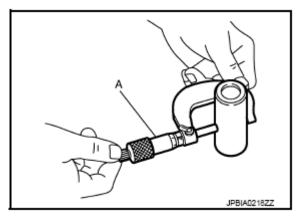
Measuring Outer Diameter Of Piston Pin Using Micrometer Courtesy of NISSAN NORTH AMERICA, INC.
